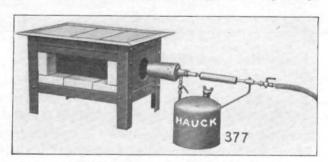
Solder Iron Furnace in connection with Hauck compressed air torch for heating larger solder irons, tool dressing, heating rivets and similar heating purposes.
